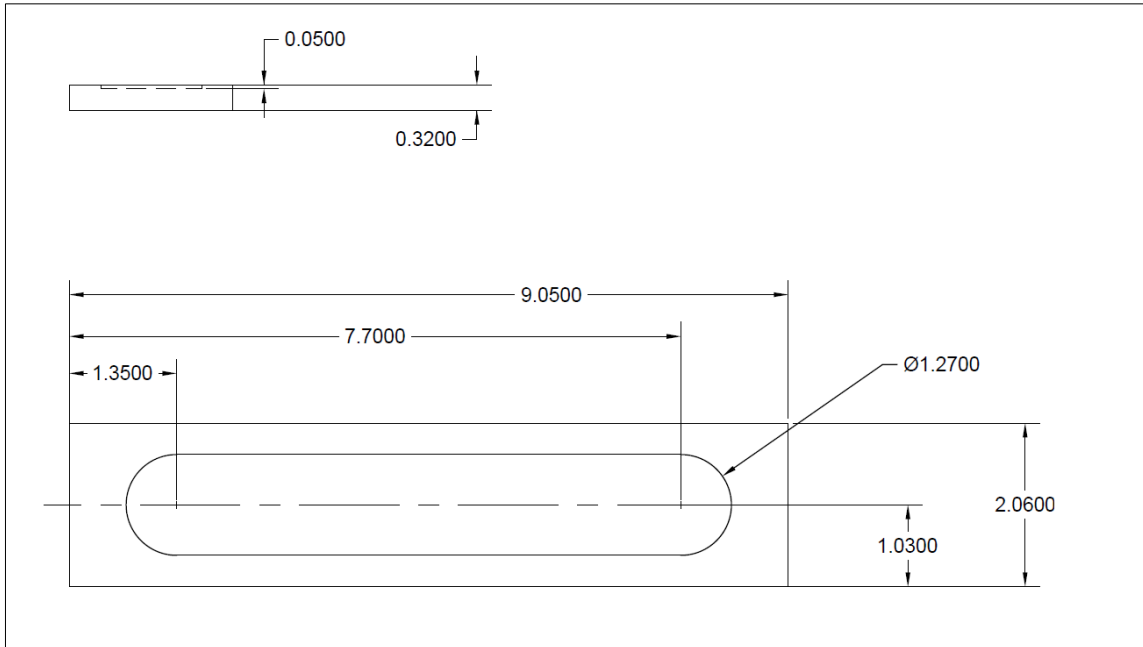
A dimensioned drawing of the target is shown. Dimensions are in cm.
